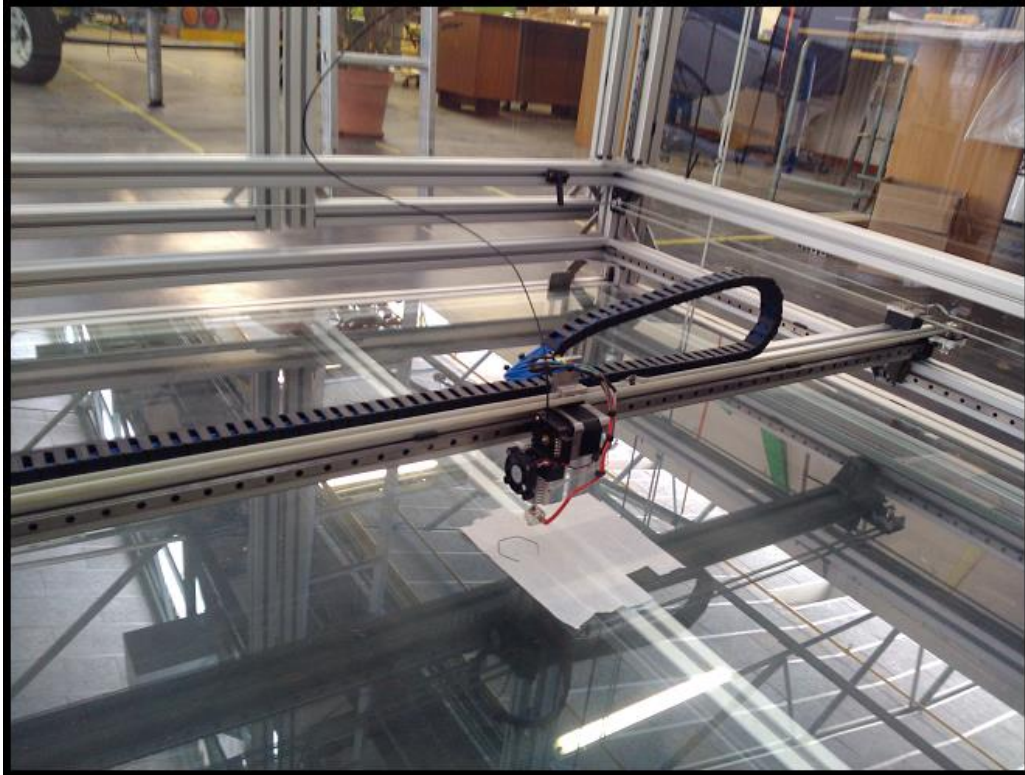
Gantry 'x' Axis and Print-Head Subassembly
